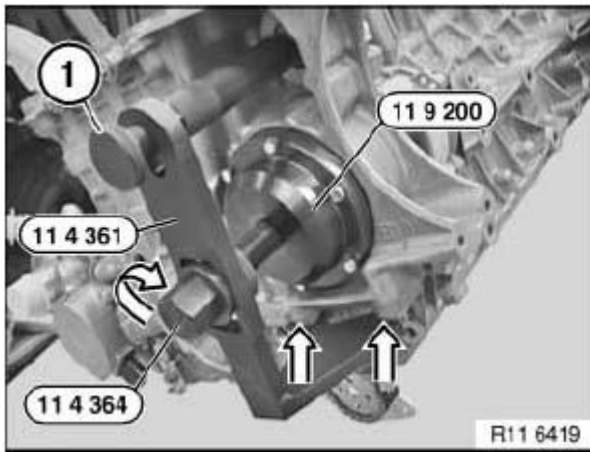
Identifying Special Tool (11 4 361), (11 4 364), (11 9 200) And Knurled Screw
